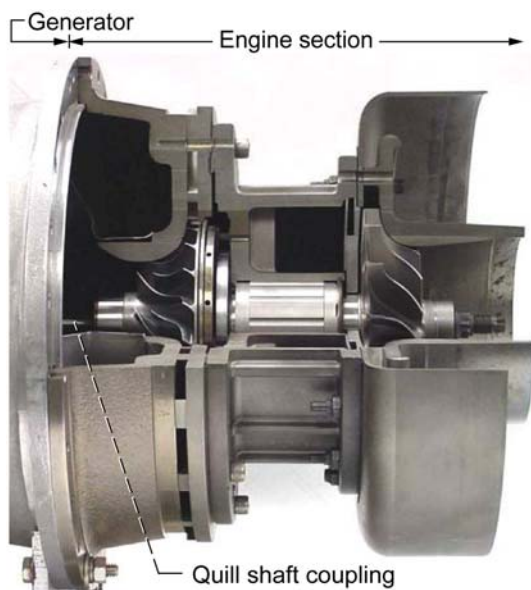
Cutaway photograph of a Capstone micro-turbine gas generator (engine) section with quill shaft coupling connecting generator (left side) to engine which carries entire thrust load.
